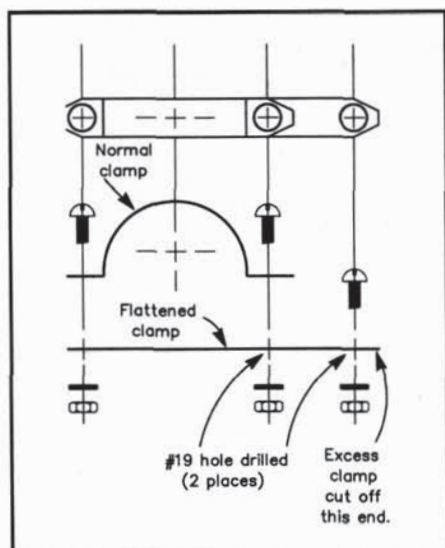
Detail of clamp assemblies. Both clamp assemblies are the same.
